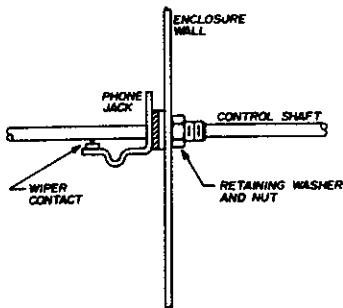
A single-circuit phone jack makes a good grounding device for a 6.5-mm (1/4-inch) diameter shaft. The jack is mounted in the shaft hole, which is drilled out to accept the jack. The wiper contact of the jack rides on the shaft as it is rotated. The contact arm of the jack is grounded to the enclosure wall. Jack is positioned so that wiper arm is inside amplifier box.
